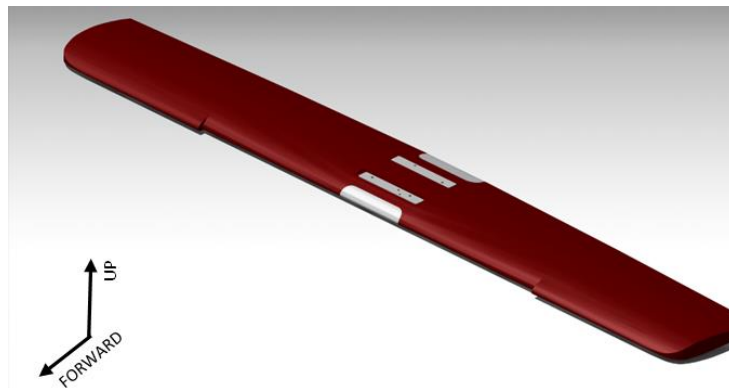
CAD model of the fixed-wing UAS wing subassembly
